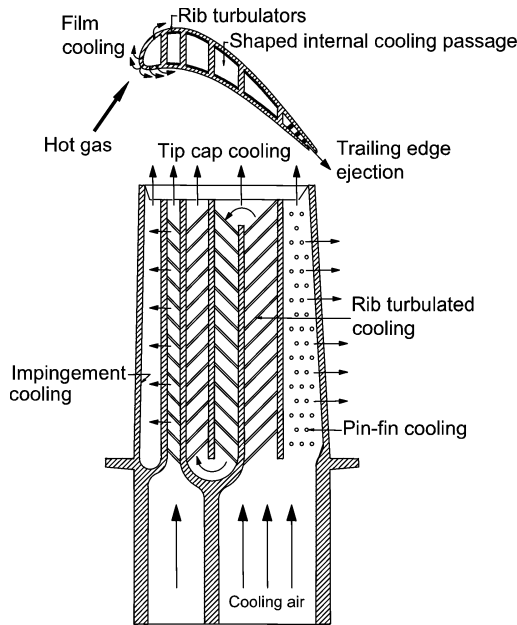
Schematic of modern gas turbine blade with typical internal cooling techniques.
